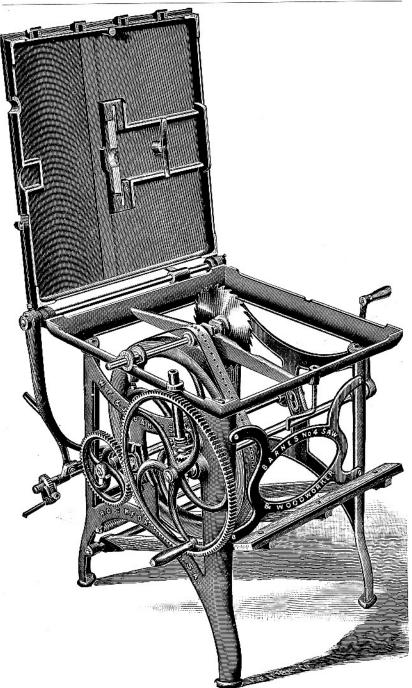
shows the machine with a special universal gauge which adapts the machine particularly for the use of picture frame makers and for any other work where a perfectly accurate joint is required.
